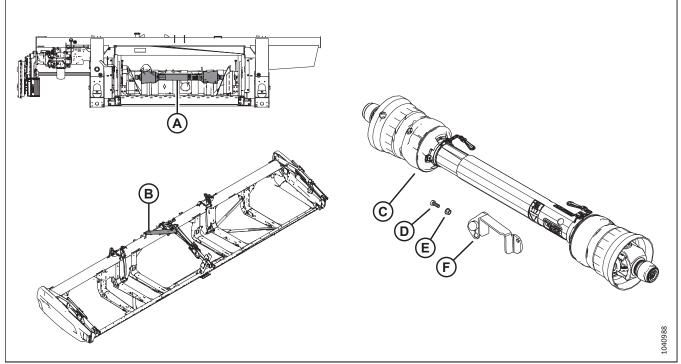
Driveline Shipping Locations and Driveline Parts
